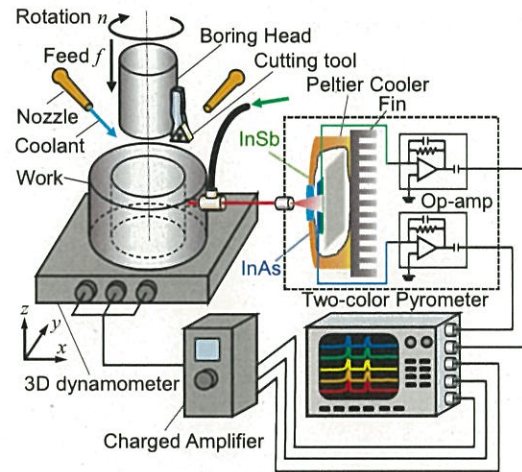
Experimental setup of internal turning carbide cutting are shown in Table 1 and Table 2 respectively.
